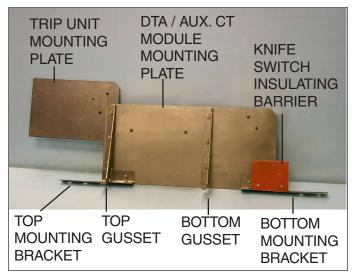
The Components of the DTA / Aux. CT Module Mounting Assembly.
